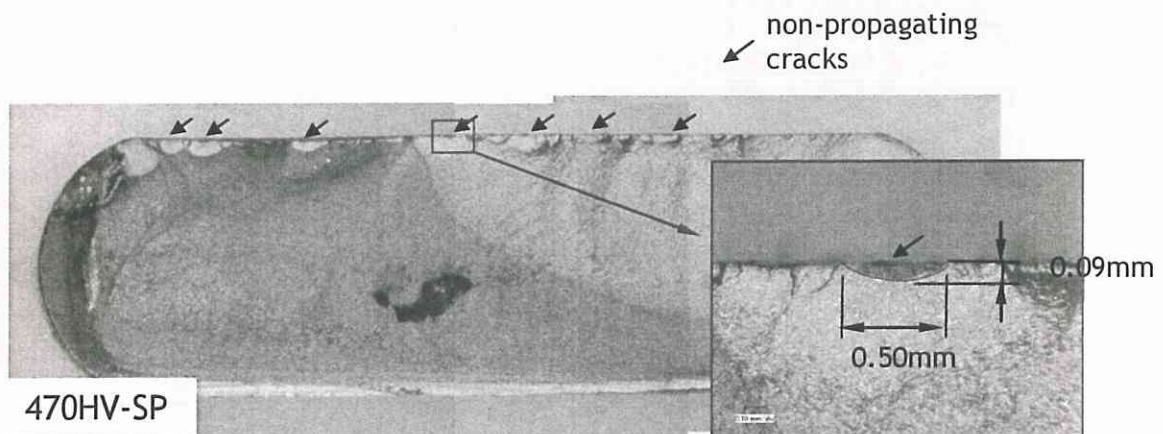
Fracture surface of specimen tested under fatigue limit. The specimen was fractured after heat tint. Seven non-propagating cracks were observed.
